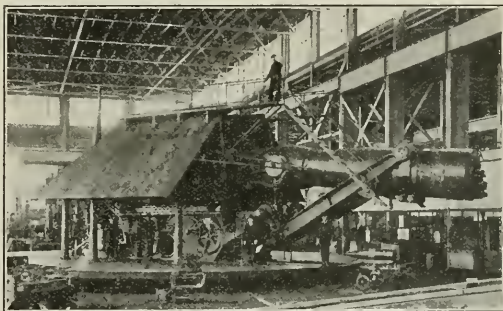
16-IN. DISAPPEARING CARRIAGE, LOADING POSITION
